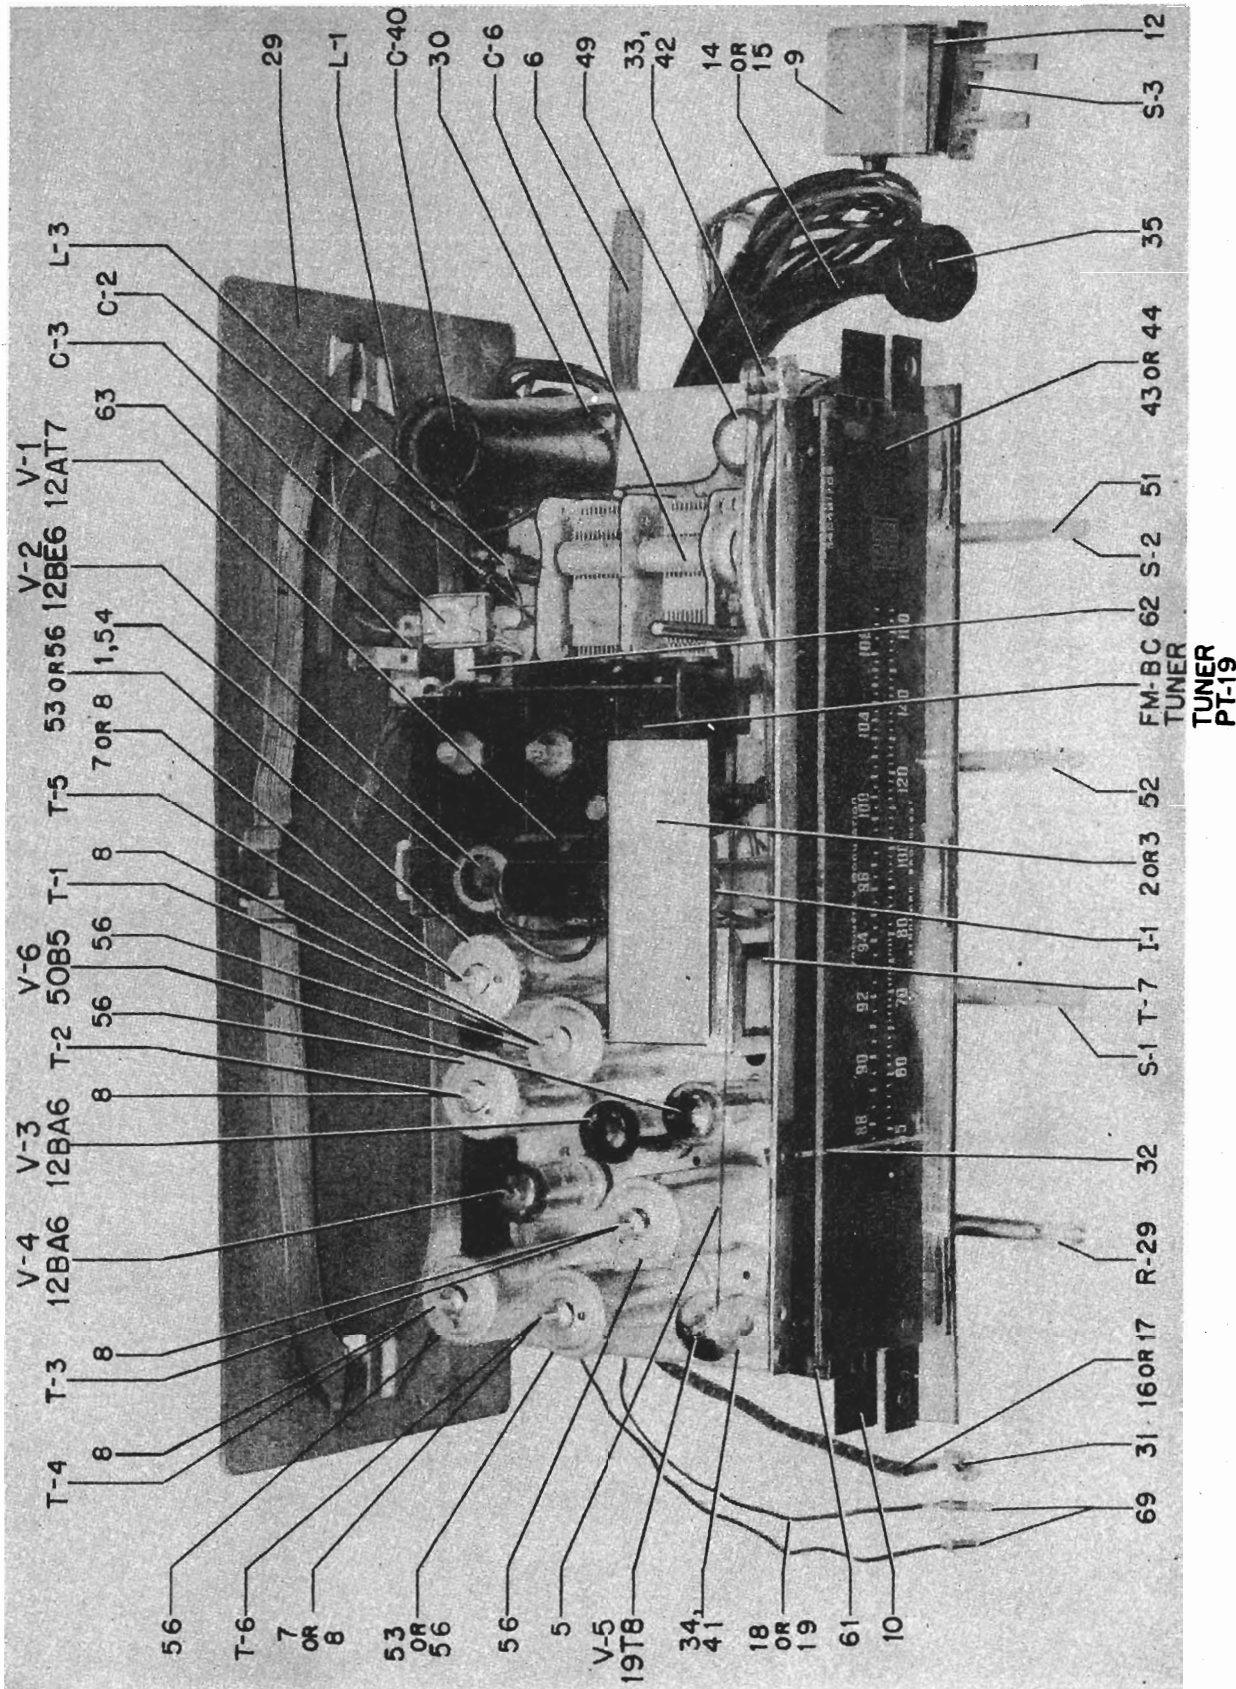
CHASSIS HS-128 & HS-132 CHASSIS PARTS LOCATION -TOP VIEW
